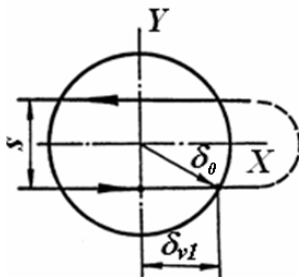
Calculated schemes to determine the tolerance δ_{v1} during the vibration assembly.
